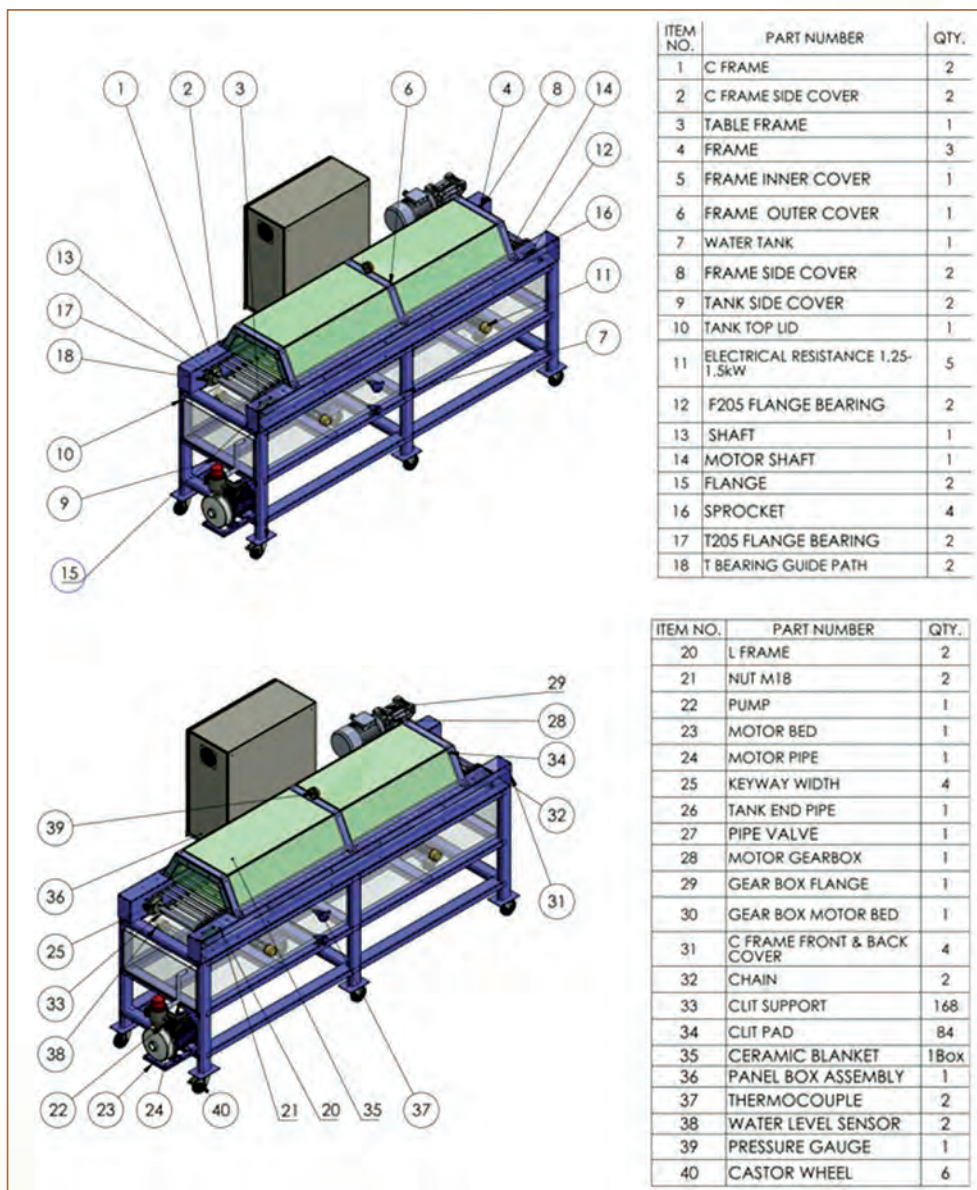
Pictorial view of continuous steaming machine with detailed assembly parts
